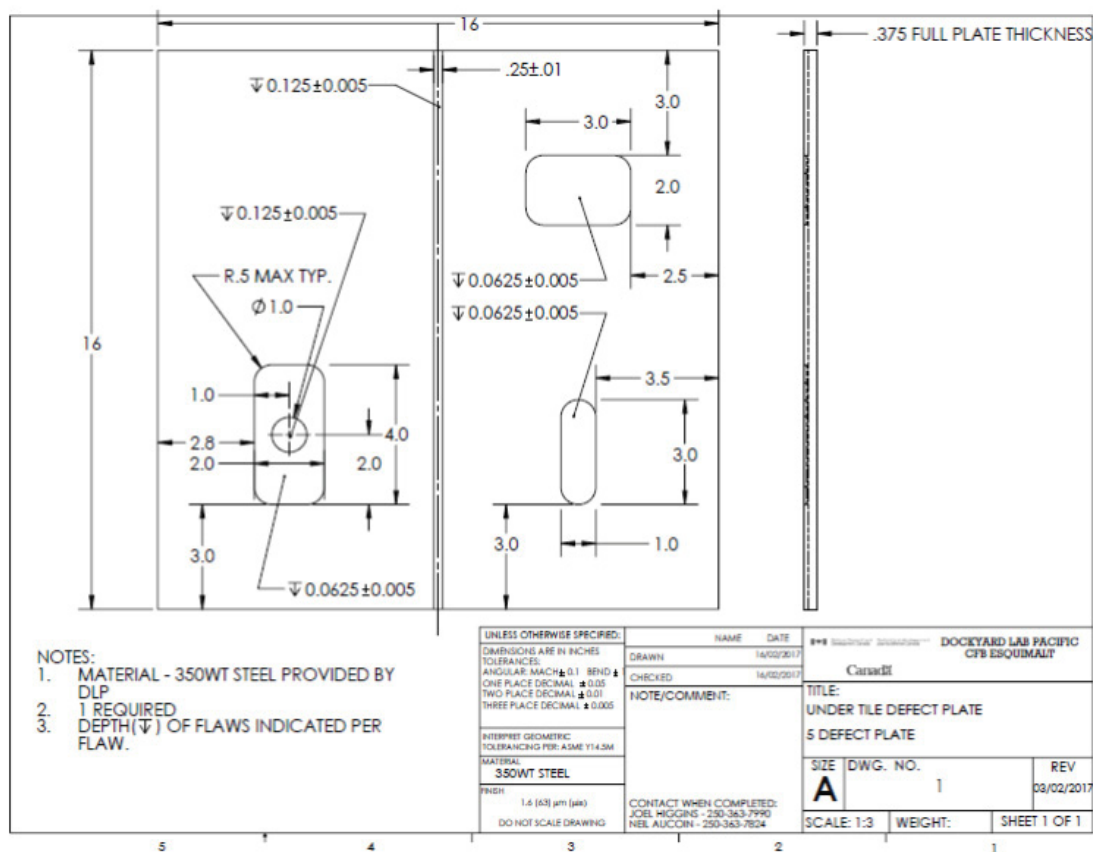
Machine drawing of test panel prepared by DRDC for proof-of-concept concealed interface scanning.
